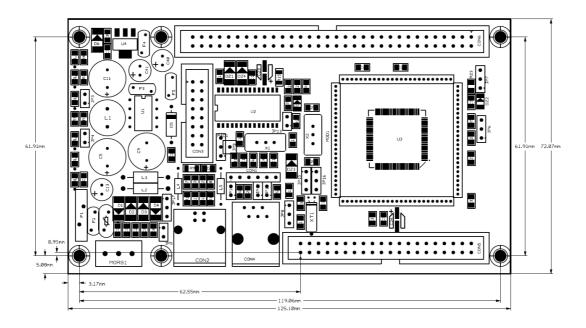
[FLEX003] Dimensions of FLEX Full Base Board
